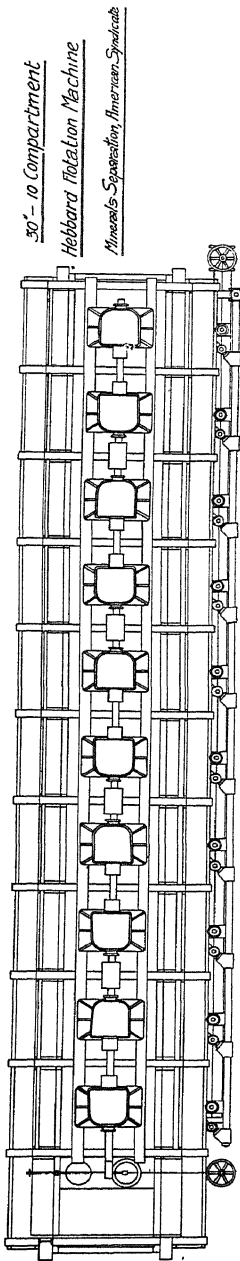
HEBBARD TYPE OF MINERALS SEPARATION MACHINE.
